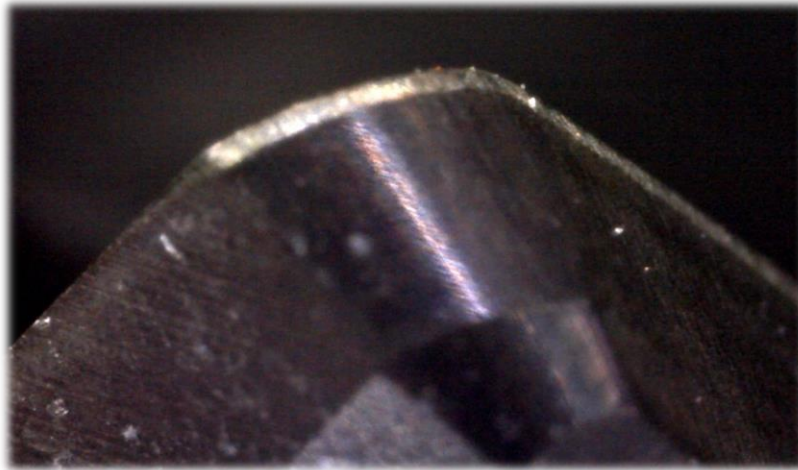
The cutting edge of a Z-Carb tool after it has been used to cut Inconel-718 with Inconel settings
